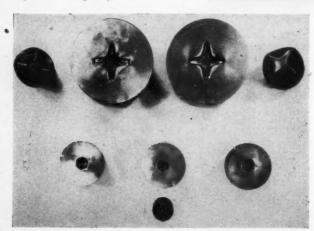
In the top row are seen an upper and a lower die insert for stamping a brass star handle, with the hobs employed for producing the impressions. The lower row shows die inserts for hot pressing brass flange nuts
